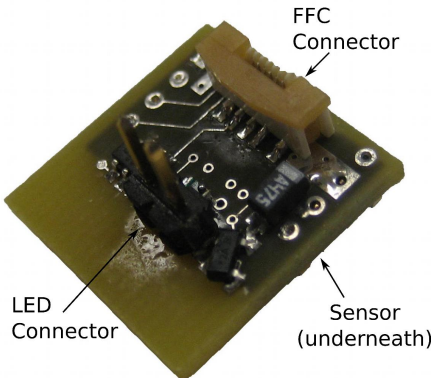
FFC connection between the ADIS16350 carrier PCB and the ADNS-2610 carrier PCB
